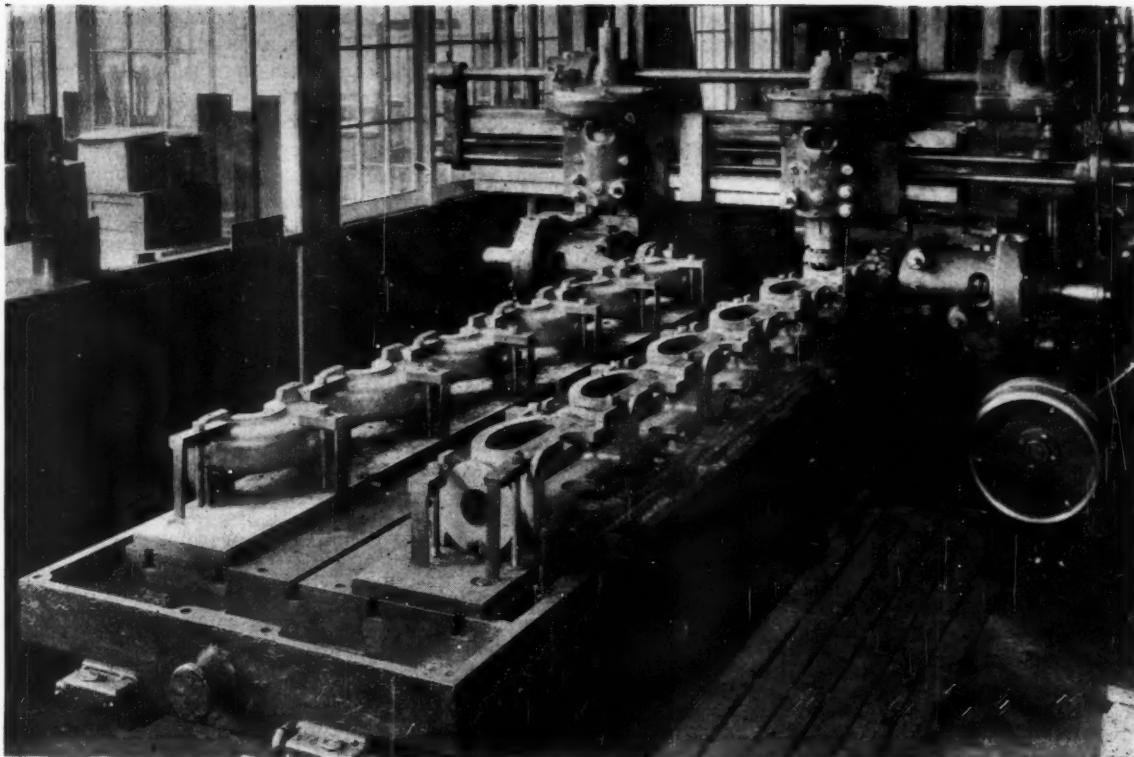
MULTIPLE FIXTURE FOR MILLING HORIZONTAL JOINT AND EXHAUST FLANGE OF WHEEL CASINGS OF SMALL STEAM TURBINES
